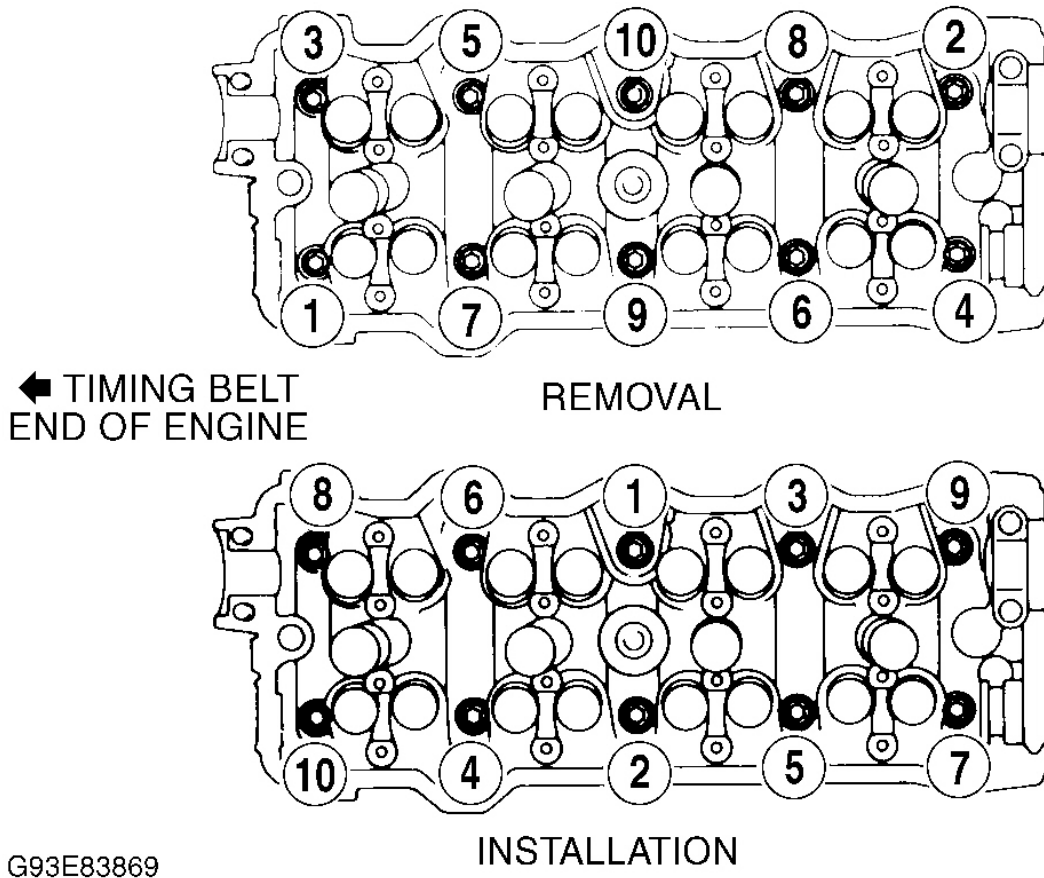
Cylinder Head Bolt Removal & Installation Sequence
